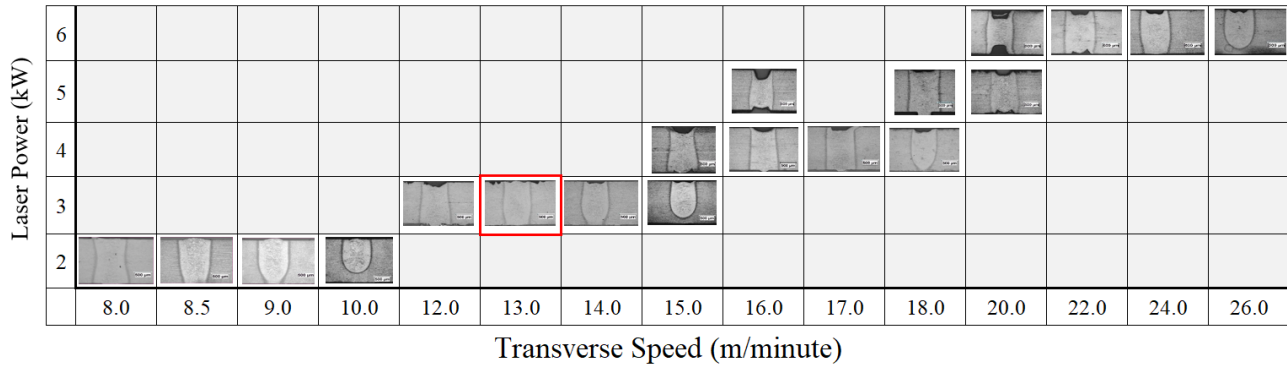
Weld cross-section charts showing different Laser Power vs. Transverse Speed combinations in the CP 980 material. The weld produced using 3 kW at 13m/minute was chosen as the optimum weld (exhibiting full BM penetration with minimum concavity). This weld parameter combination was used for the remainder of the research with this material.
